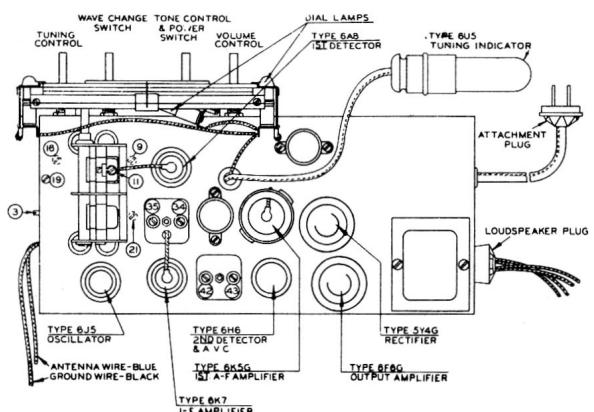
Chassis Layout Showing Controls and Tube Locations—Model 832.
